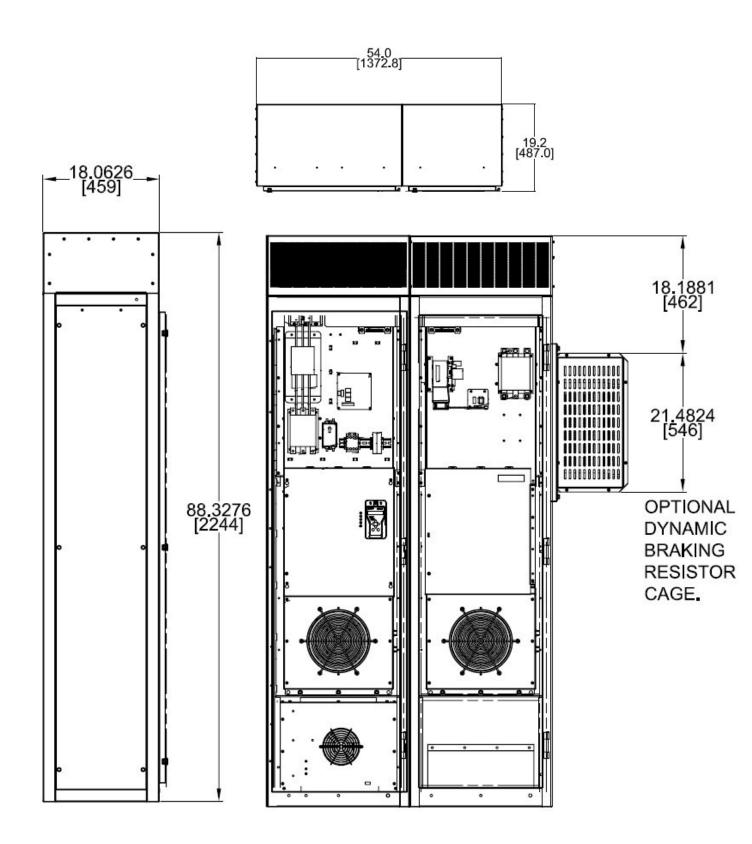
200A and 250A unit dimensions without optional Customer I/O Panel
